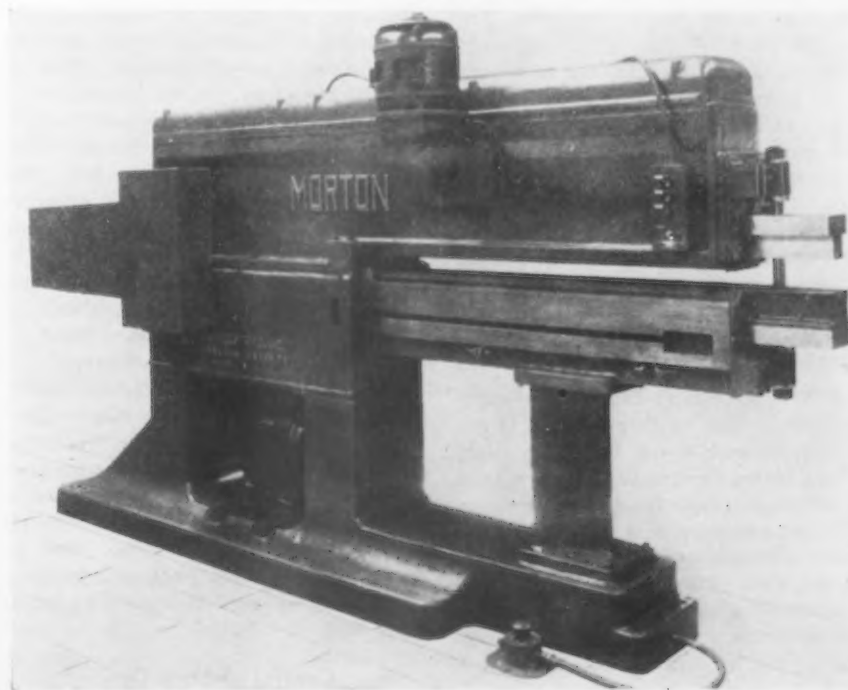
After welding, the flash is removed from both sides of the sheet simultaneously by this draw-cut flash trimming machine, the operation leaving little material for grinding. Grinding is done automatically on a conveyor.
